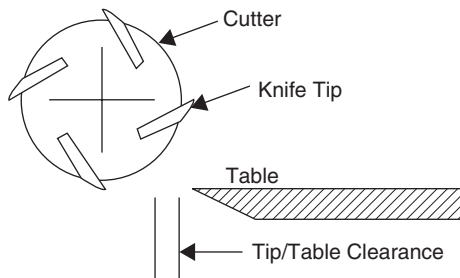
Typical straight knife cutter mounted on moulder spindle.
